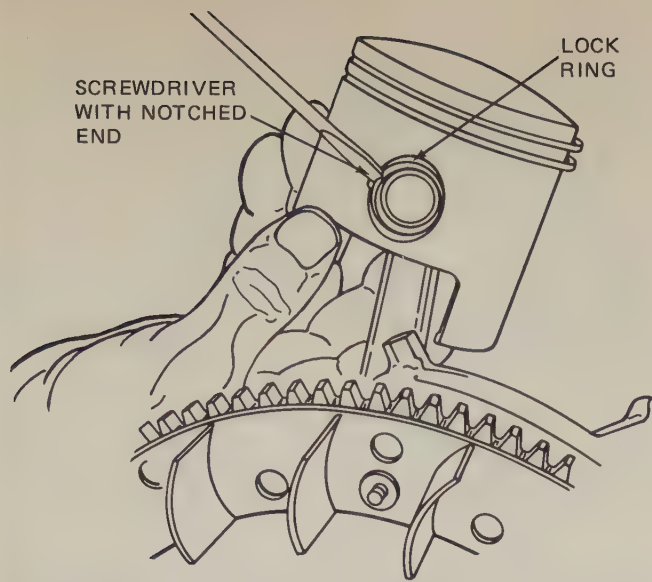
Screwdriver with a notch ground in the end of the blade, used to remove piston-pin lock ring. (Kohler Company)
